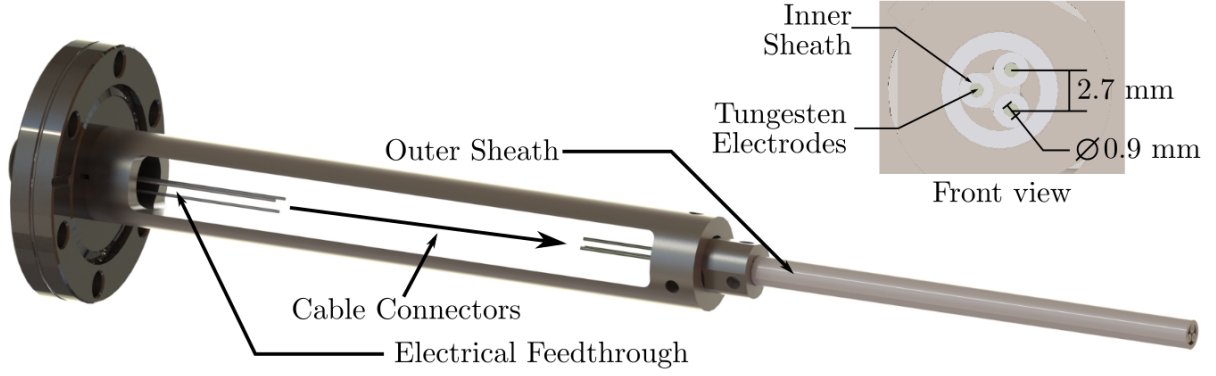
CAD drawing of triple probe geometry showing alumina insulating sheath and tungsten probes.
